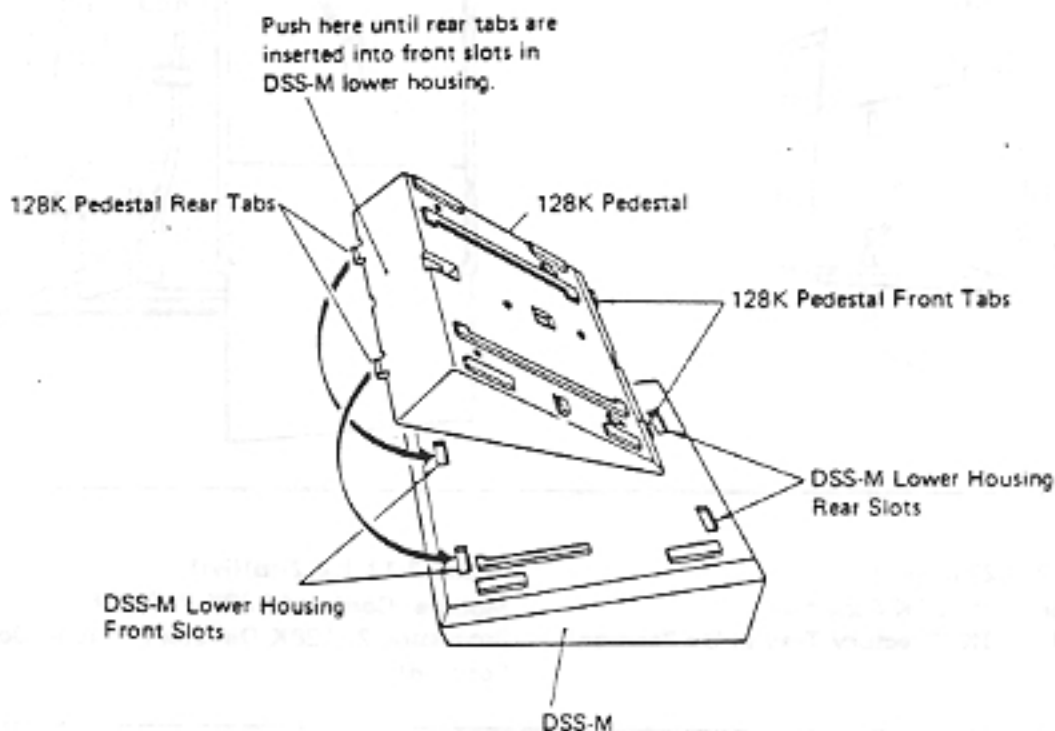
(2)(b)(ii) Mounting 128K Pedestal on DSS-M Lower Housing
